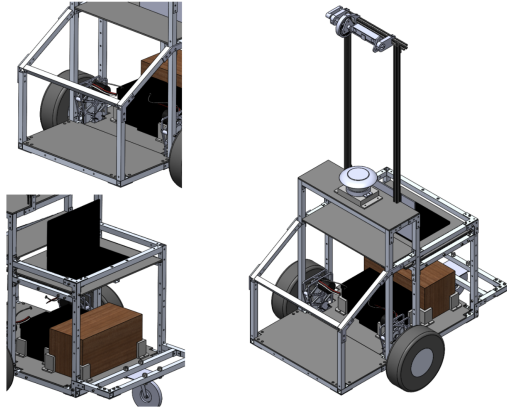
Top left: electronics housing. Bottom left: load housing. Right: isometric view of mARVin
